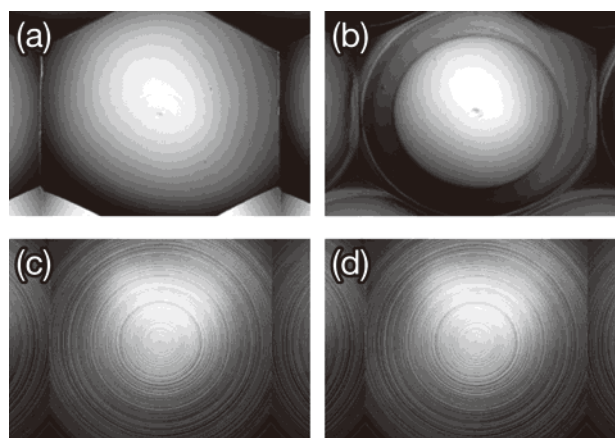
A machined surface by a single crystal diamond at (a) onset and (b) after machining long distance, and machined surface by NPD at (c) onset and (d) after machining long distance.
